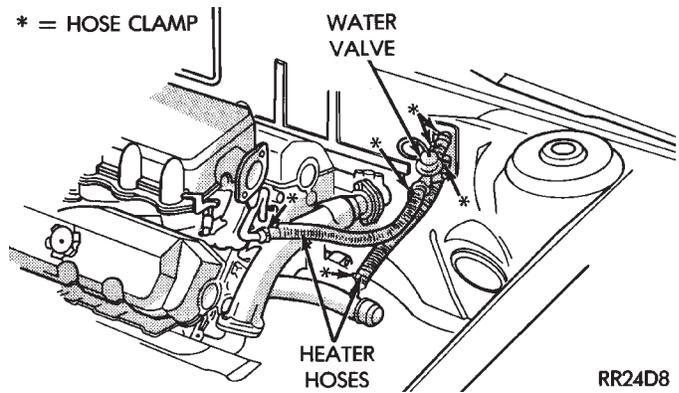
Heater Hose Routing—3.0 L Engine—Typical
